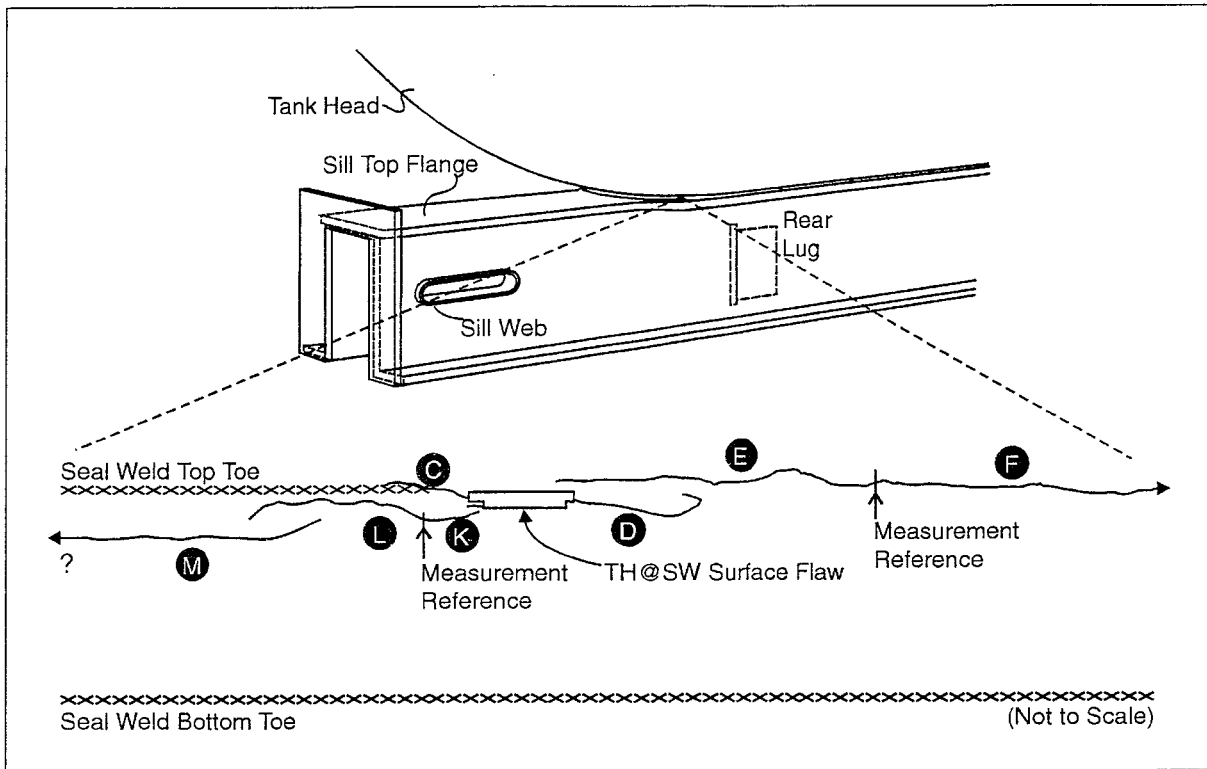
A-end Left Seal Weld Cracks and Preflaw
